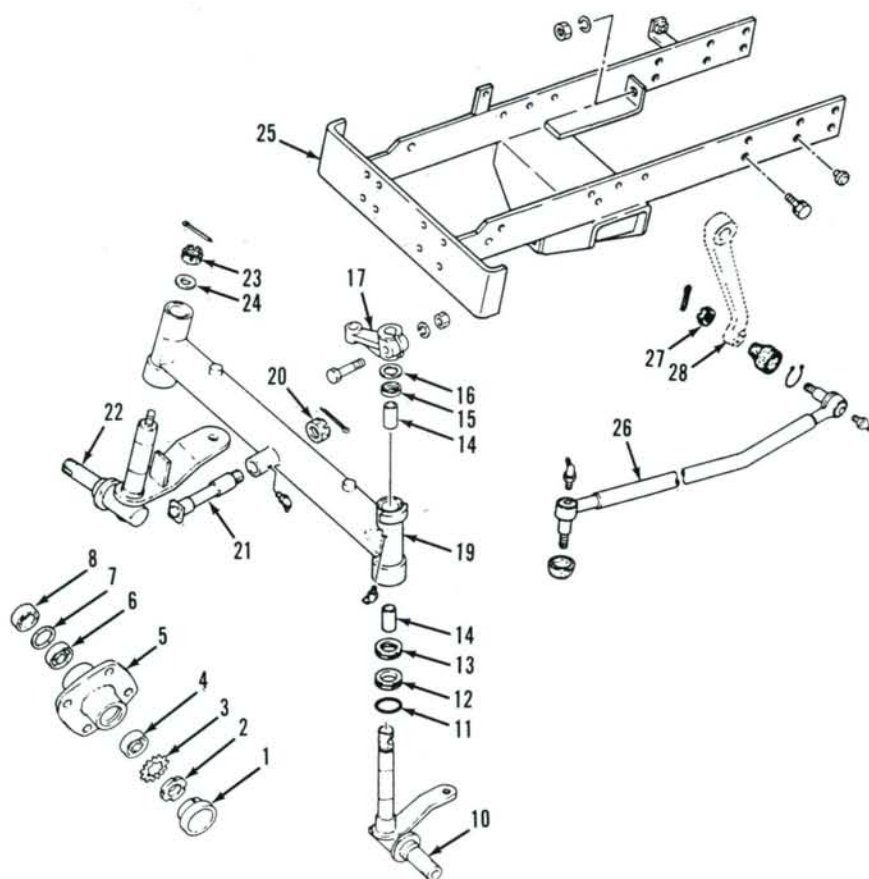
Exploded view of front axle used on 235 models. Drag link (26) attaches to arm (17) and tie rod connects arms attached to the spindles (10 & 22).
